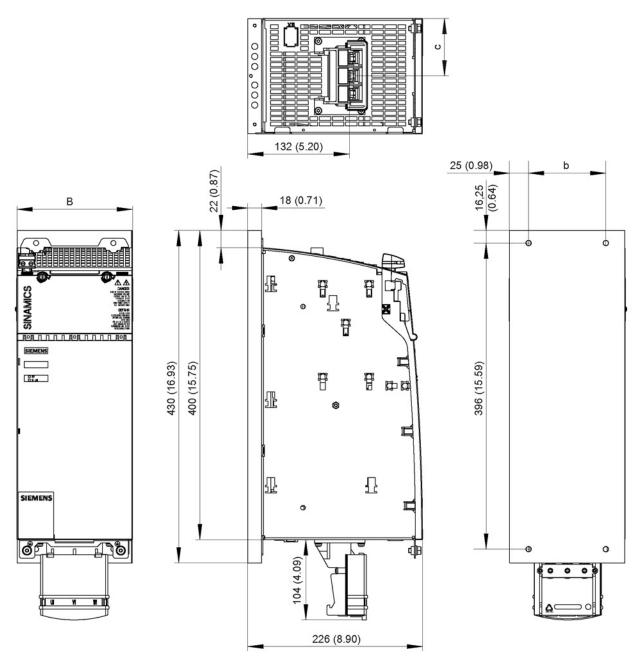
Dimension drawing of 36 kW, 55 kW, 80 kW, and 120 kW Active Line Modules with cold plate, all dimensions in mm and (inches)
